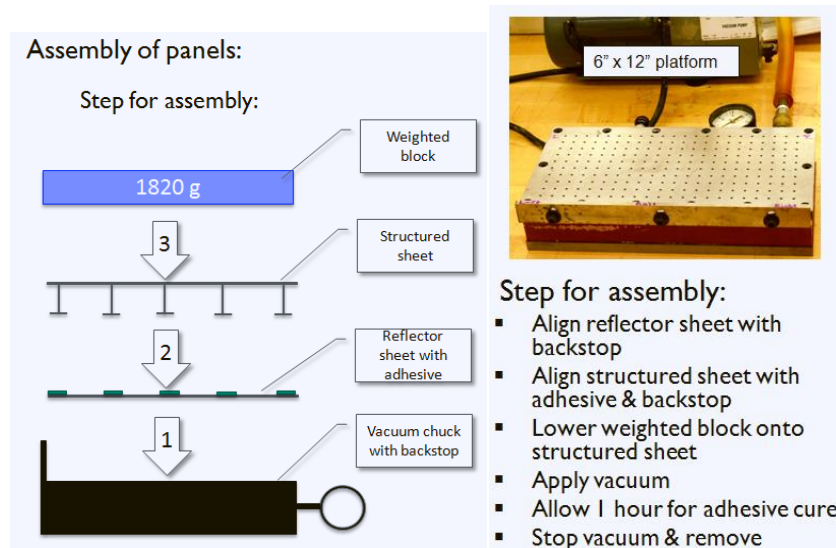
Prototype assembly sequence; the vacuum chuck is shown at top right.
